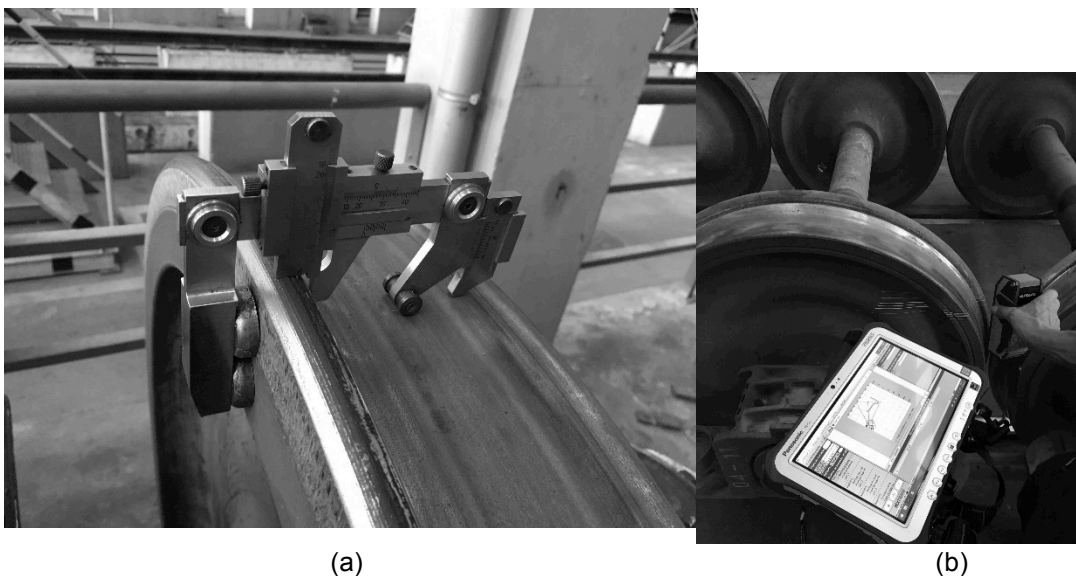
Inspection activities: (a) using a gauge device, (b) using a laser equipment.
